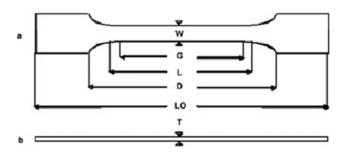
(a) Top view of sample dimensions. (b) Side view of sample dimensions.
